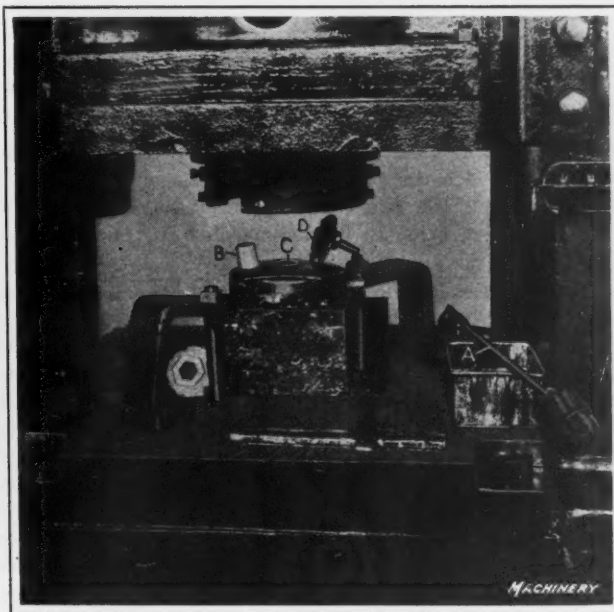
Double-action Power Press equipped with Compound Dies for producing Forgings *D
